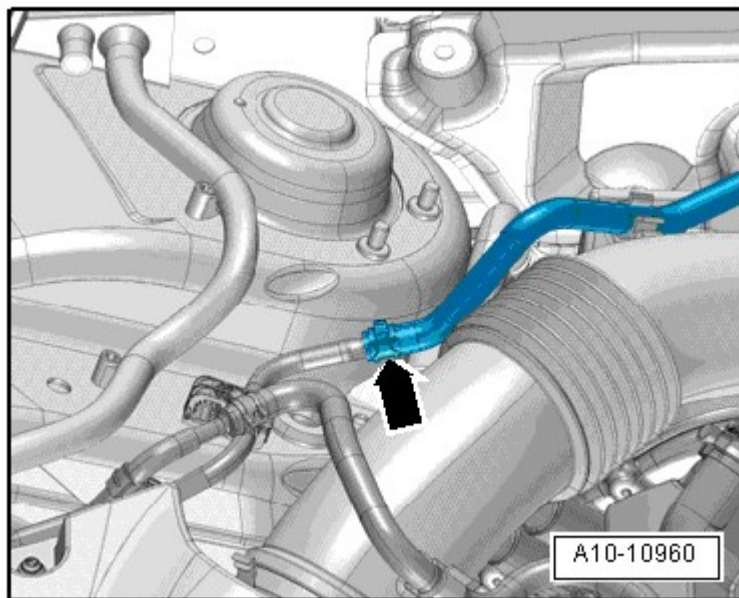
Identifying Vacuum Hose -Arrow- To Leak Detection Pump -V144-
